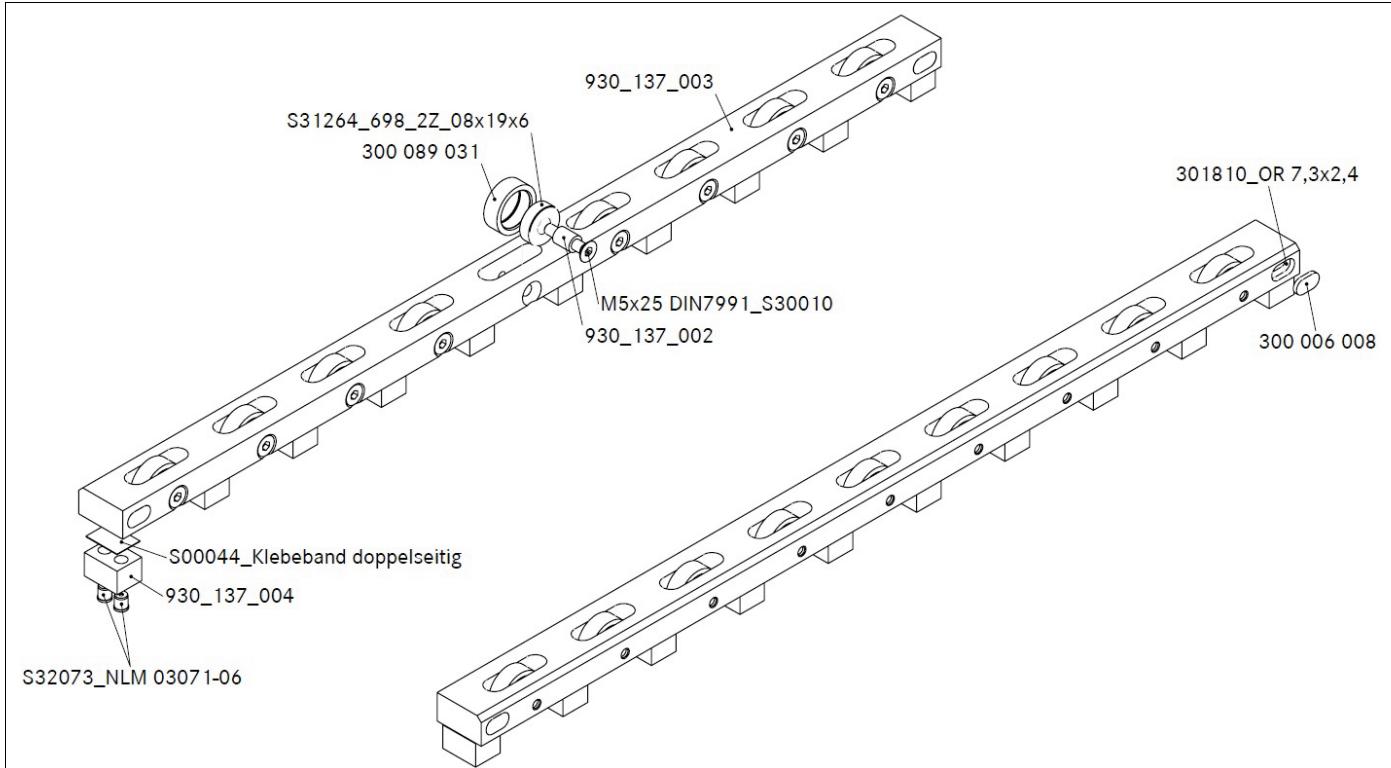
Spring loaded roller bar for ZE/ZED in roller section (UB400 PB160-400)
